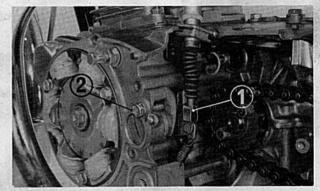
(1) Clutch cable (2) Locking bolt
